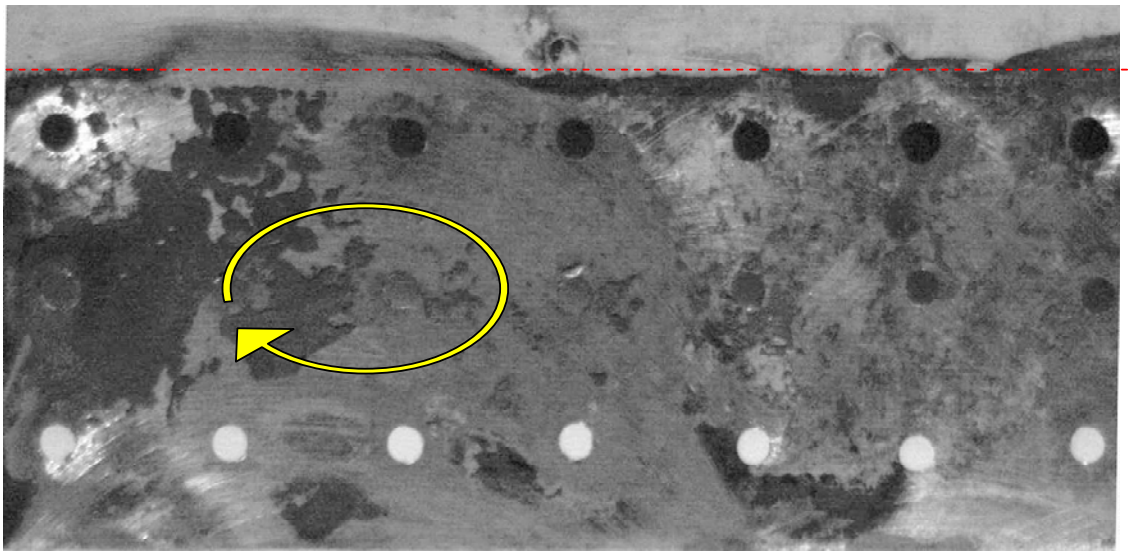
Scenario Showing how Grinding Could Remove Excessive Amounts of Material from Around Rivet Holes.
